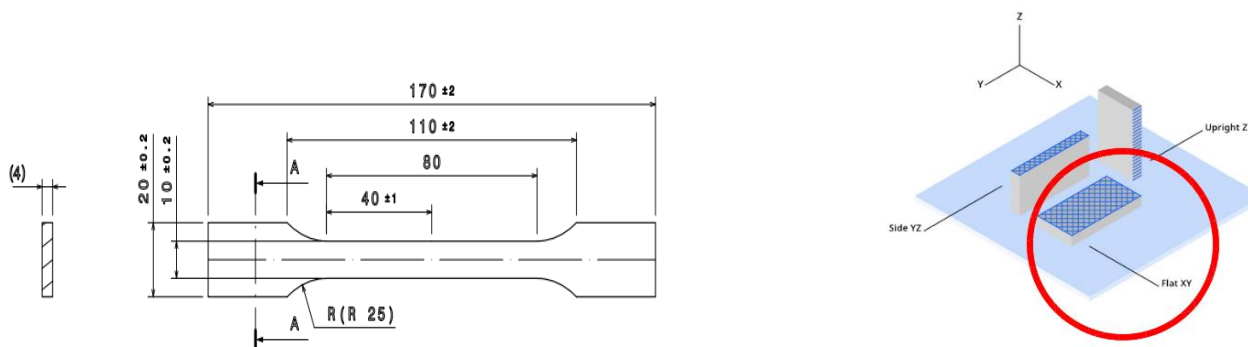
a. Specimen dimensions (in mm), b. Printing strategy of TPU 95A specimens
